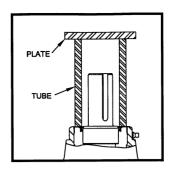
Preparation for Final Installation of Inboard Seal
